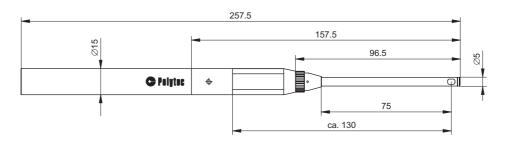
View of the side exit head OFV-C-102 (dimensions not specified are given in mm)
